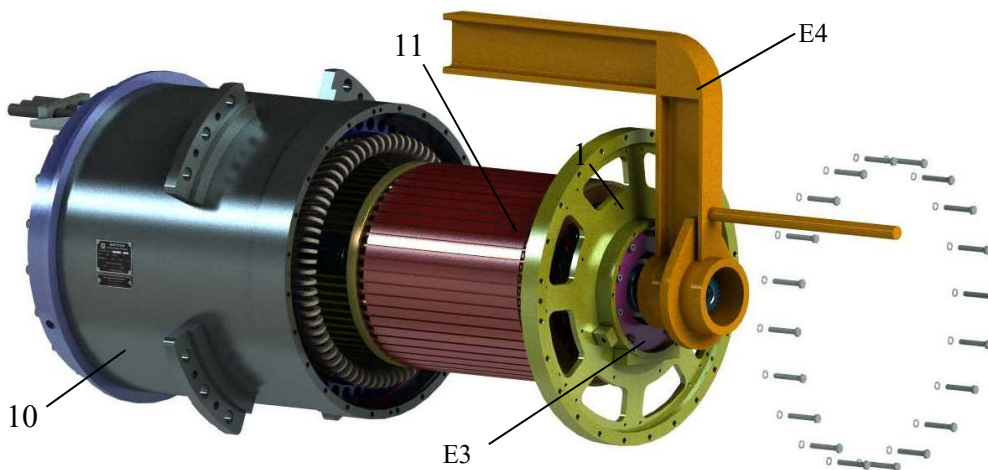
Dismantling of the Bearing Shield (Drive Side)
